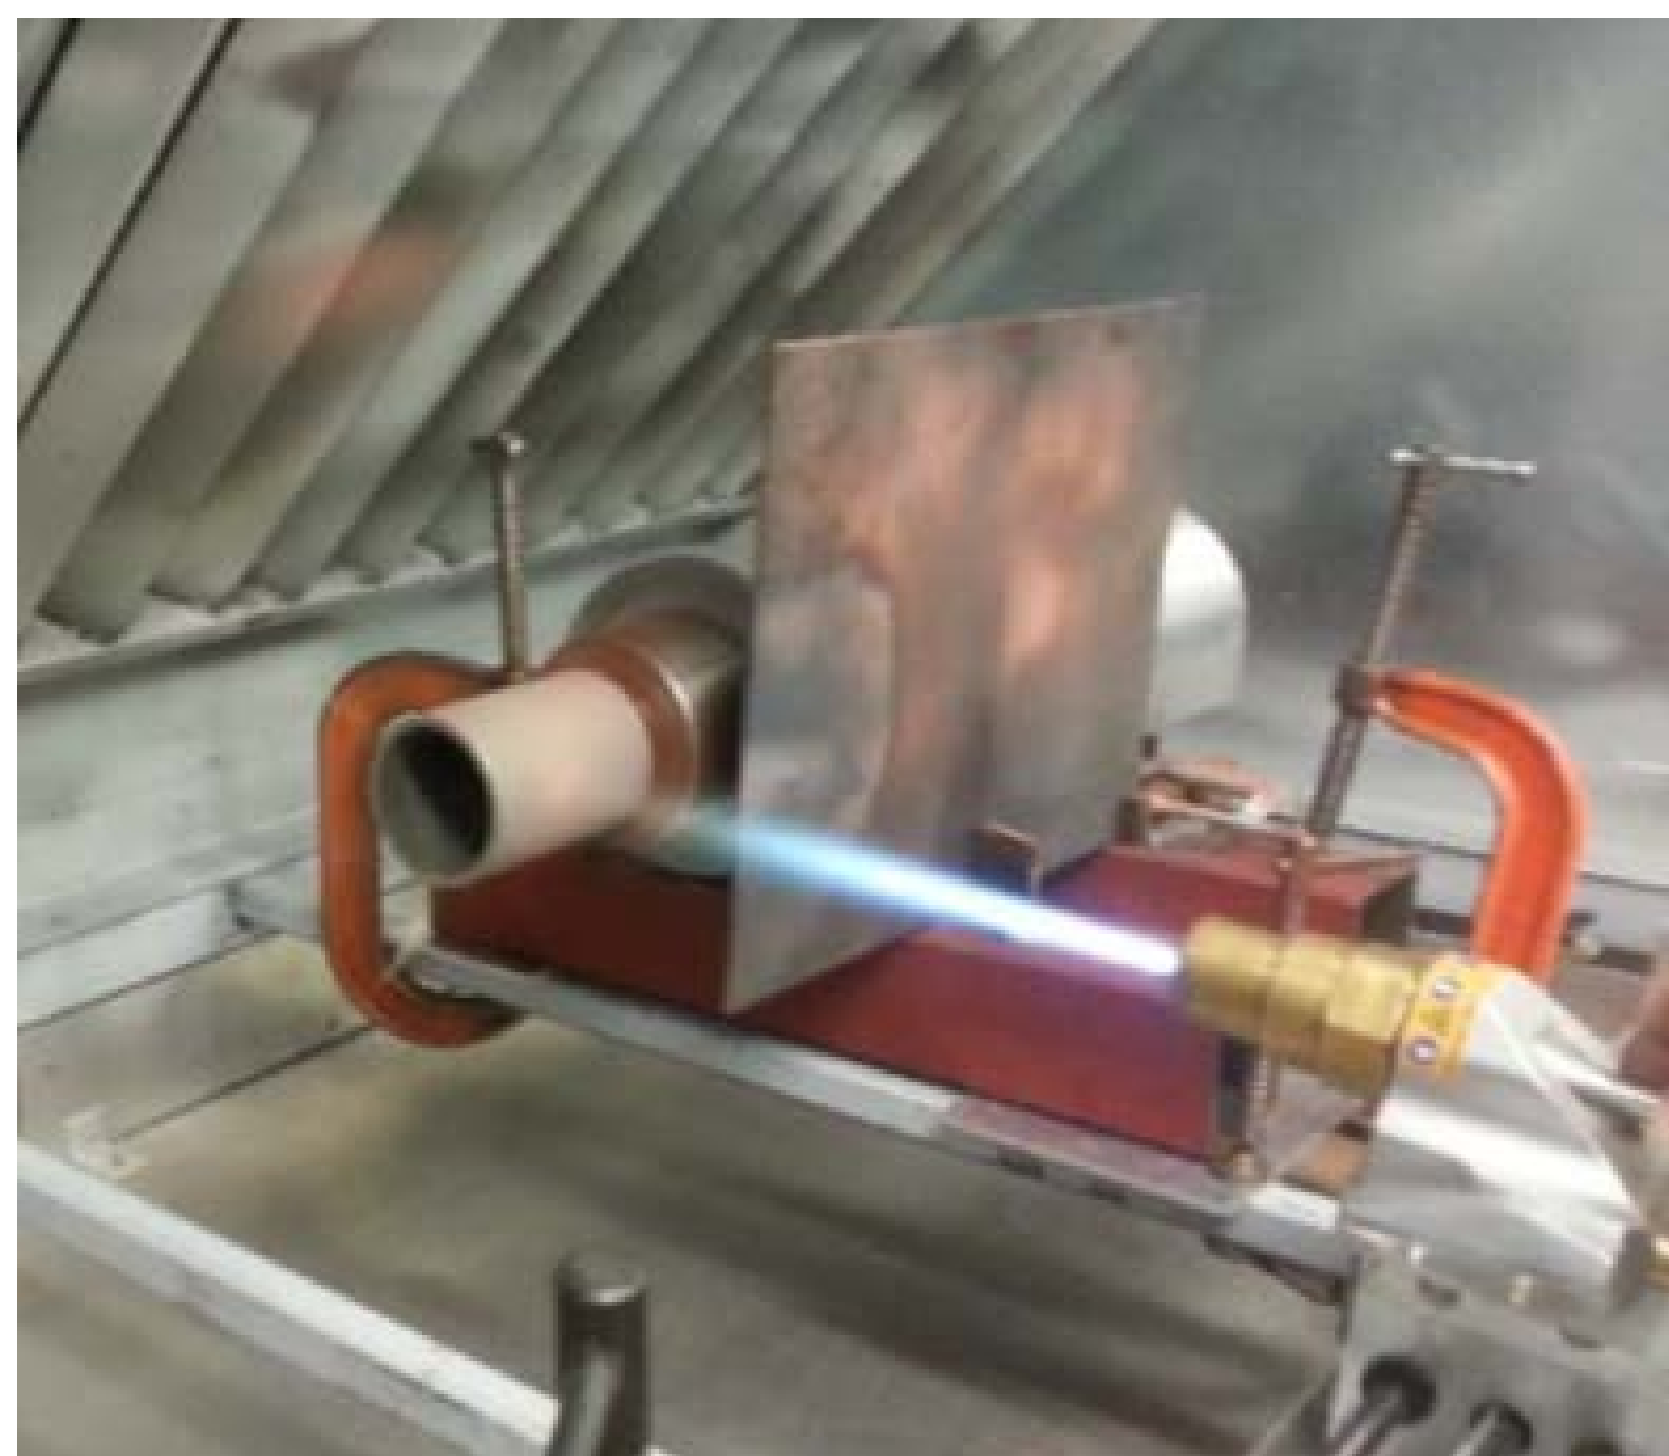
Thermal spraying of a pipe sample using a rotational fixture.
